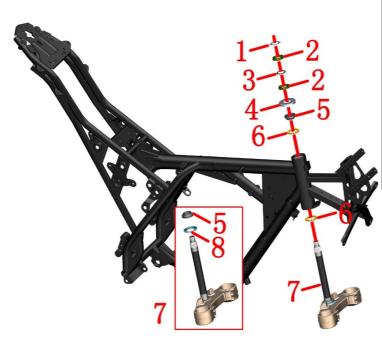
FRAME&ELECTRONIC		Steering rack component	CHK	401
